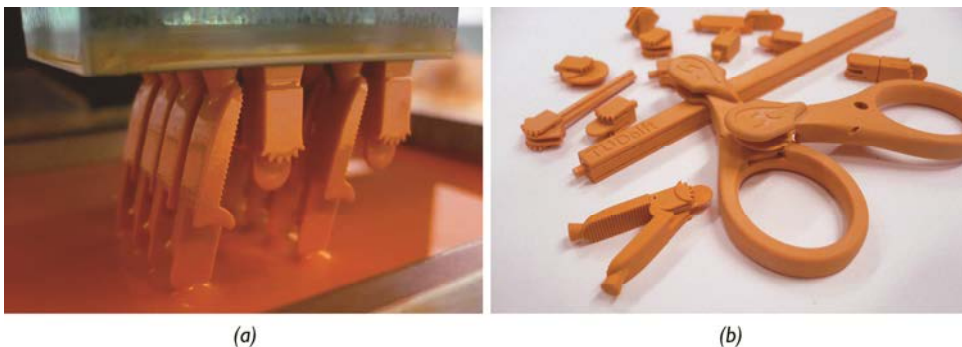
(a) Real-scale DragonFlex prototype components 3D-printed from a ceramic-filled epoxy resin; (b) Individual solidified components after the printing process (courtesy of TNO).
